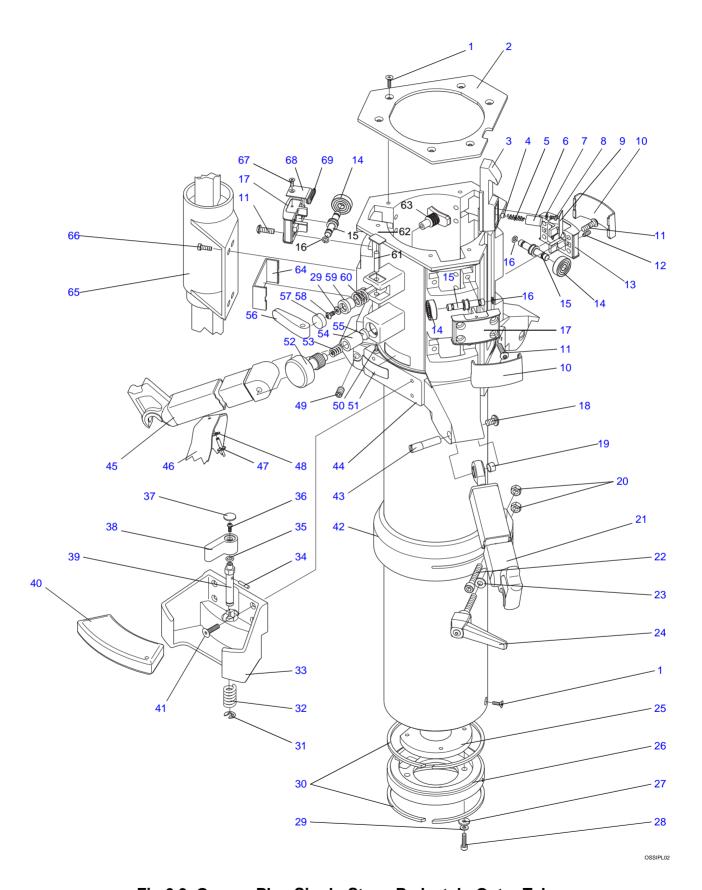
Osprey Plus Single-Stage Pedestal - Outer Tube
